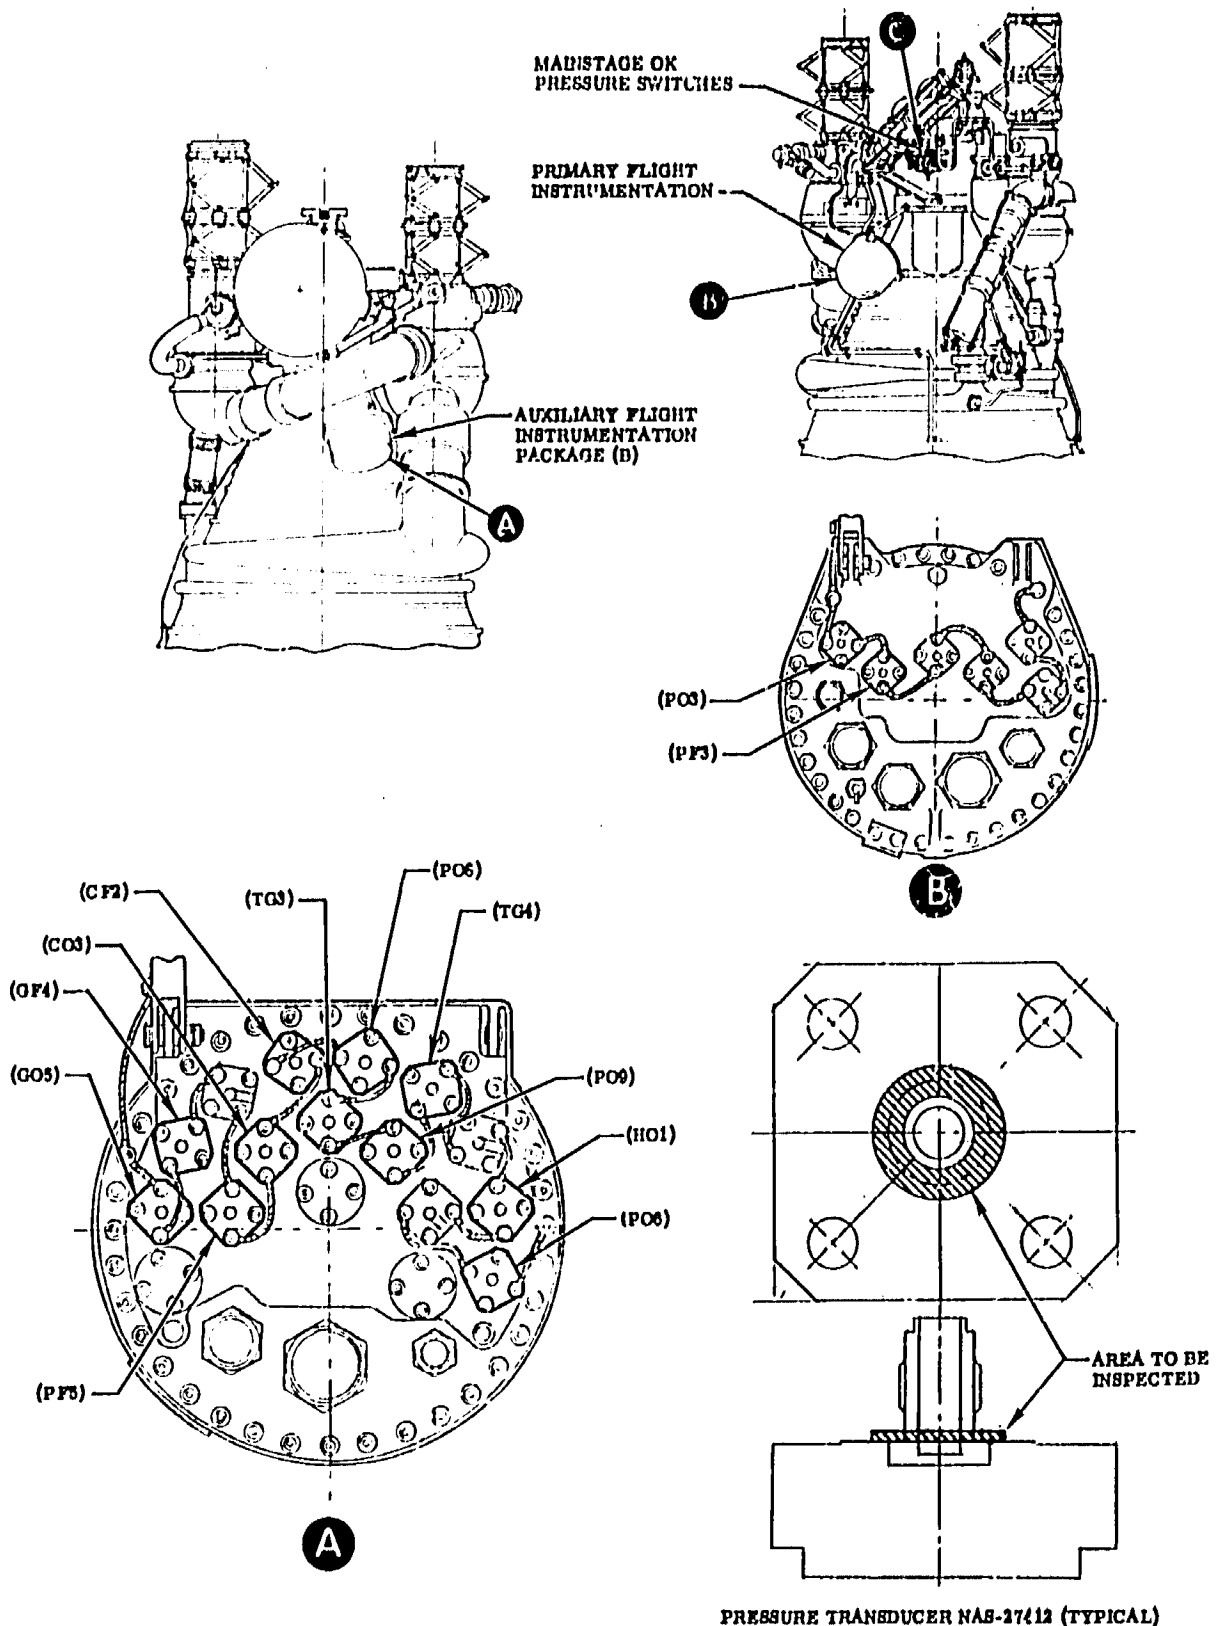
A1. Stress Corrosion Inspection (Sheet 1 of 2)
